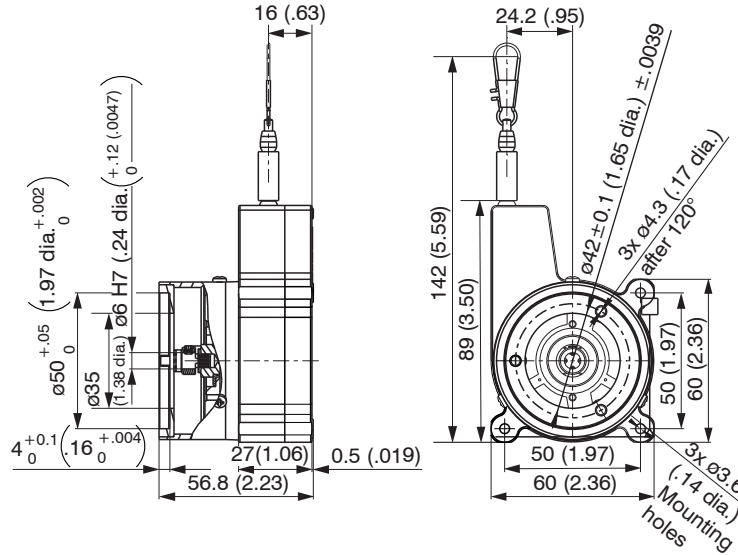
Dimensional drawing WPS-2400-MK60-M, dimensions in mm (inches), not to scale
